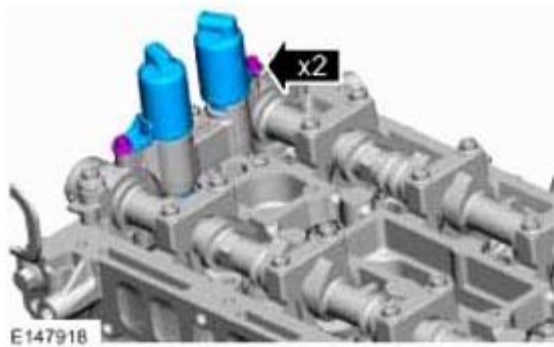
Locating VCT Oil Control Solenoids Bolts
